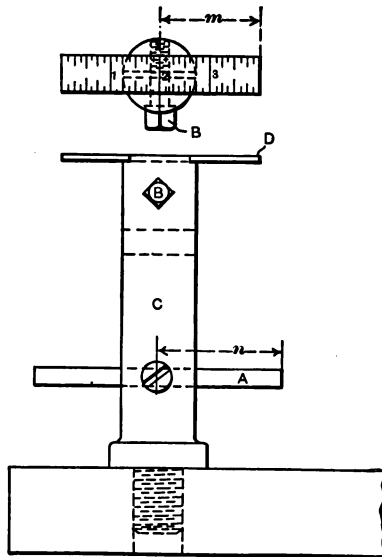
Device for Setting Grinding Fixture to Grind a Certain Radius at Point of Cutter
